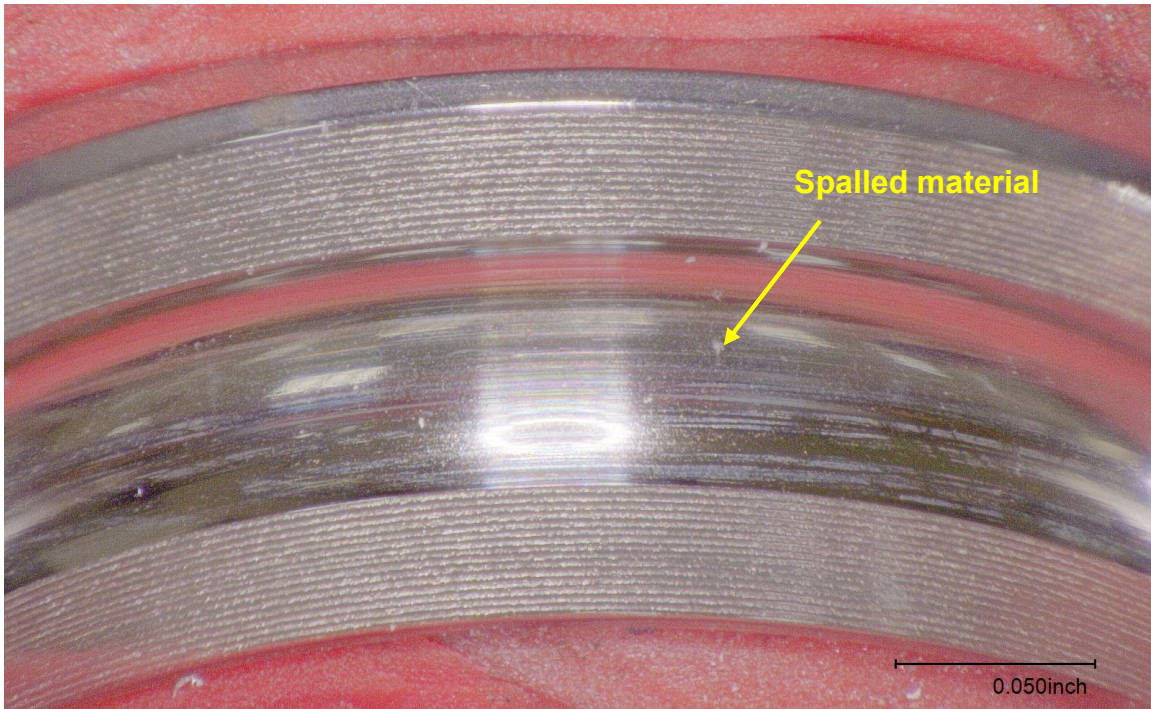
The race of the outer bearing ring from the output gearshaft gearing, after disassembly. Isolated areas of material spalling were identified.
